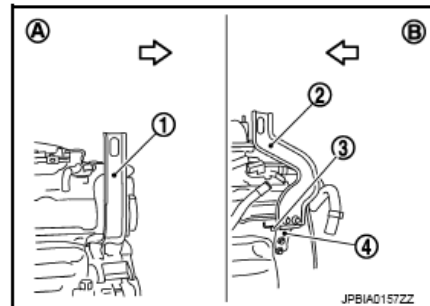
Identifying Engine Front Slinger, Spacer, Engine Rear Upper And Lower Slinger
